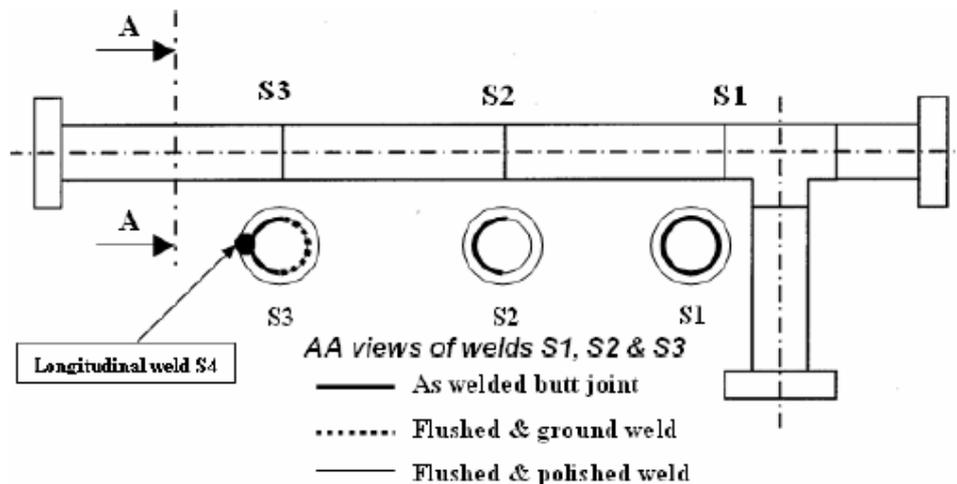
FATHER mock-up - Description of the three welds
